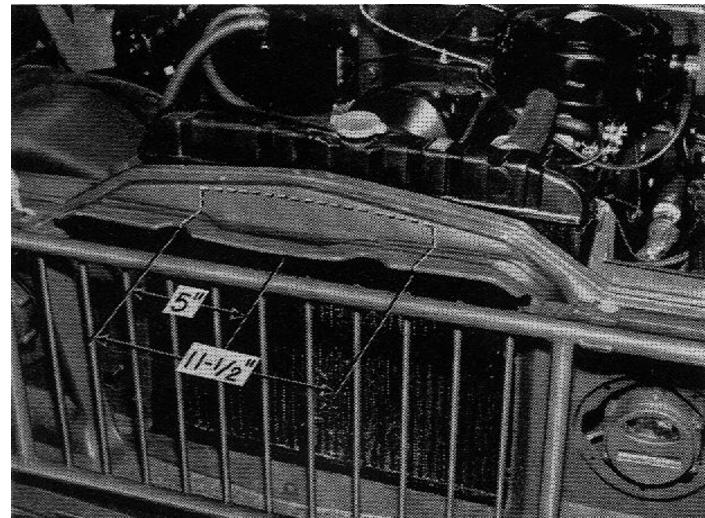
E2- RECTIFIER MOUNTING LOCATION
